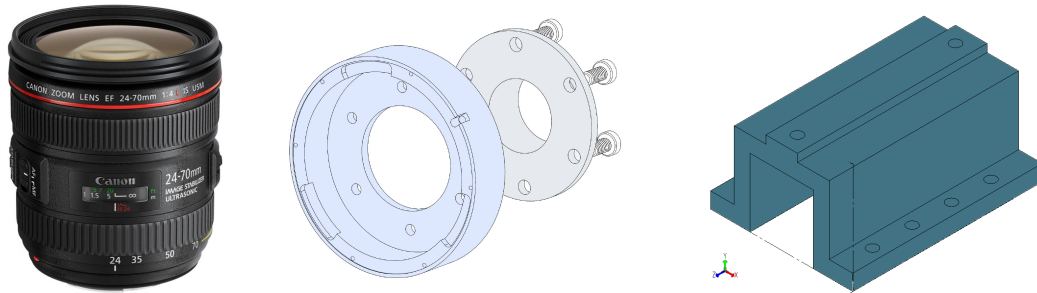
Left: The Canon EF 24-70mm f/4 lens chosen for the design of SSH-WFS. Middle: The CAD design of the adaptor, which mounts Canon lens on the Zyla camera. Right: The CAD design of the mount which places the Zyla camera on the optical plate of SSH-WFS.
